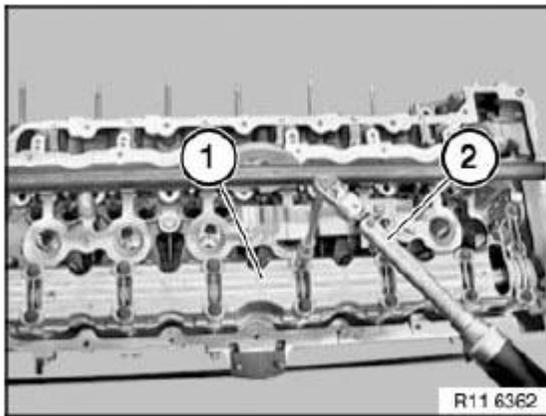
Identifying Lower And Upper Bearing Strips In Camshaft
